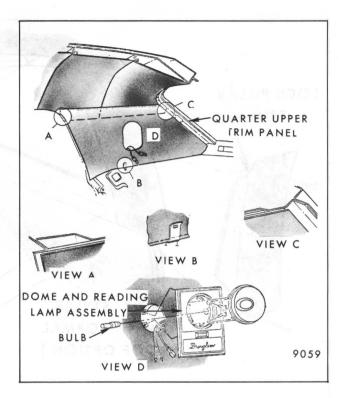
Quarter Upper Trim Attachment - Cadillac "C-69" Style
